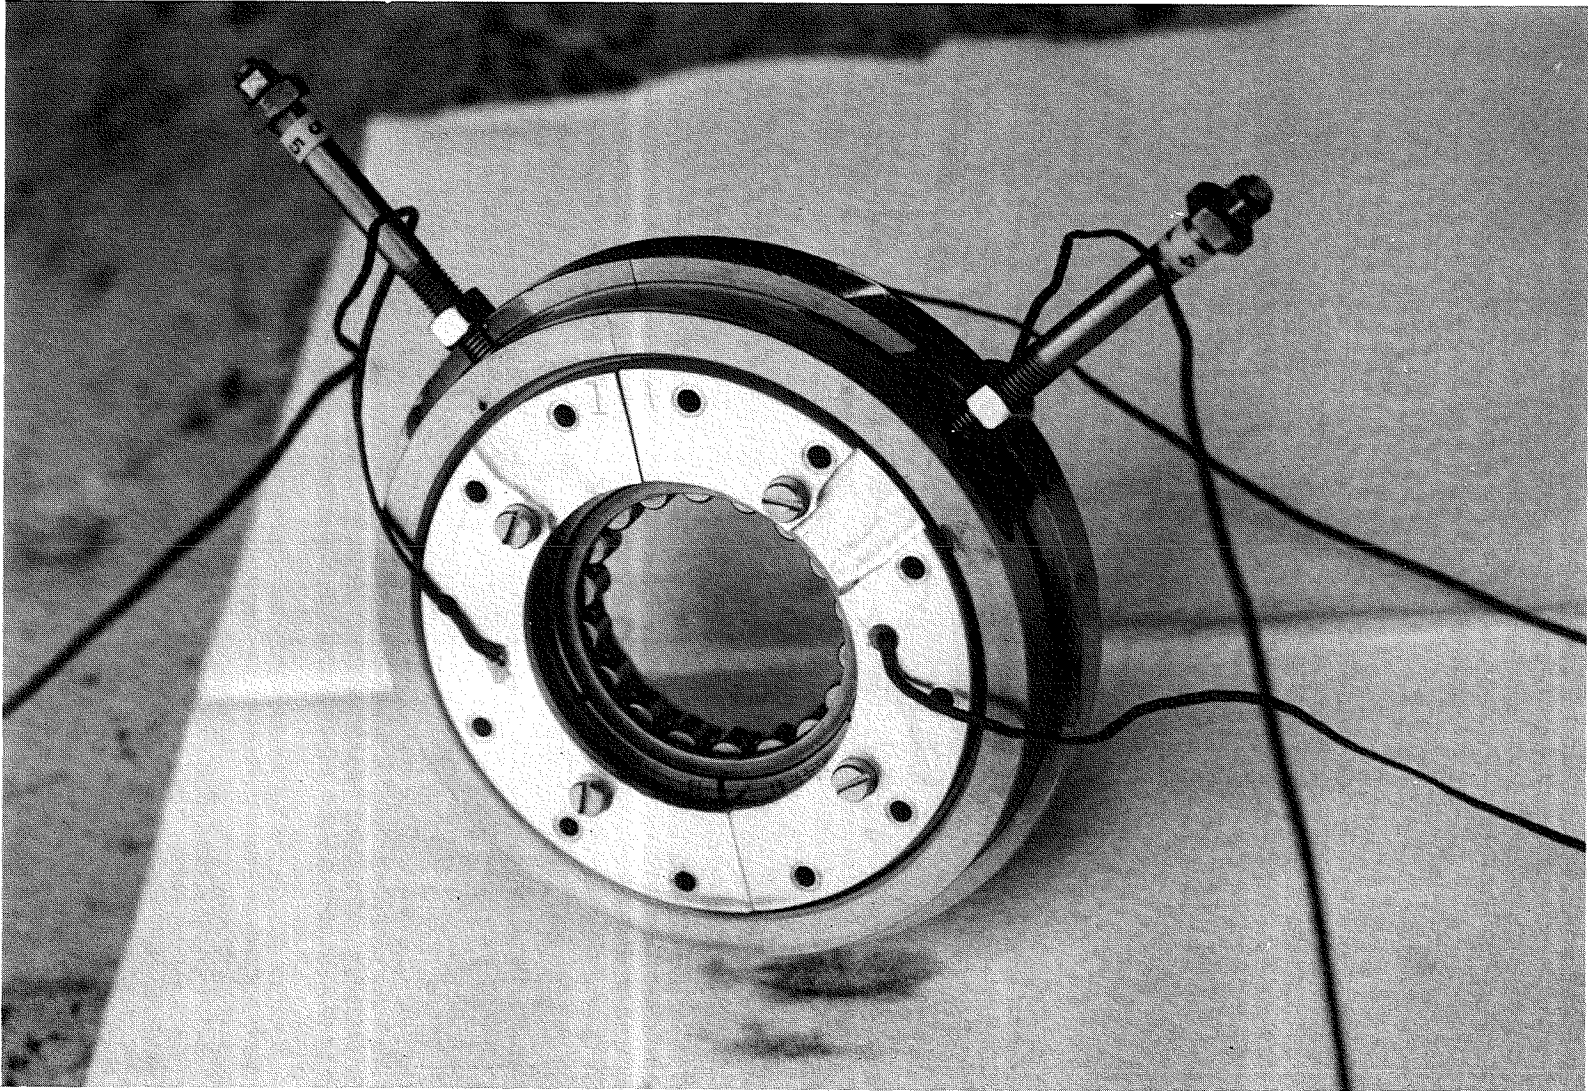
Assembled T-55 Power Turbine Elastomeric Damper
